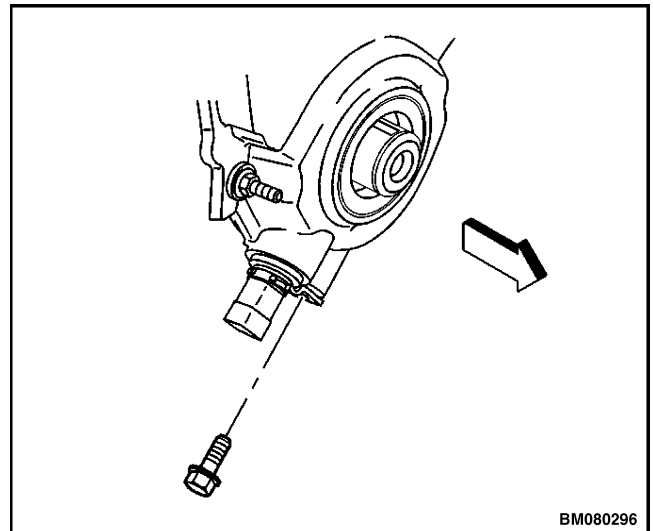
Crankshaft Position (CKP) Sensor Mounting Bolt
